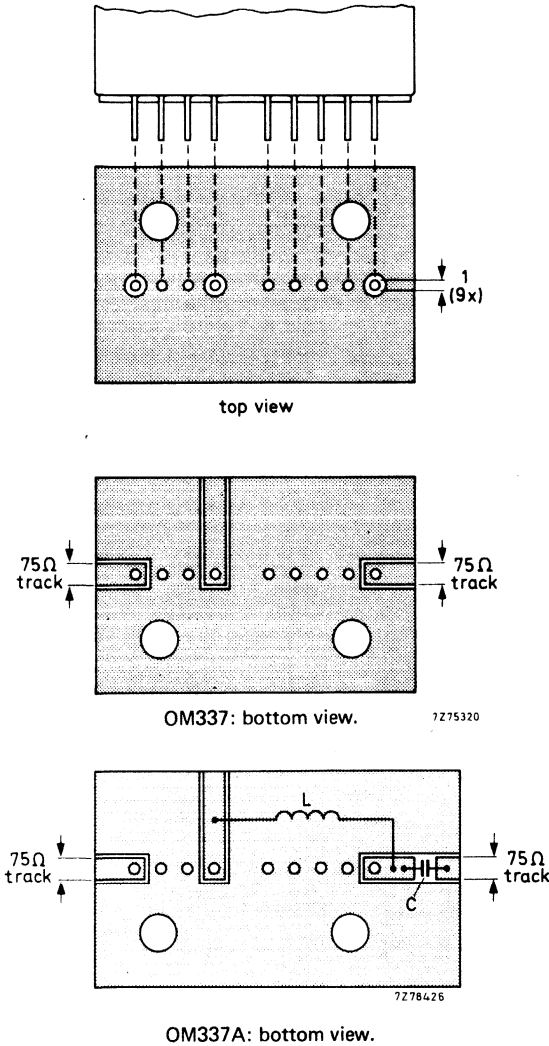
Printed-circuit board holes and tracks for the OM337 and OM337A.
